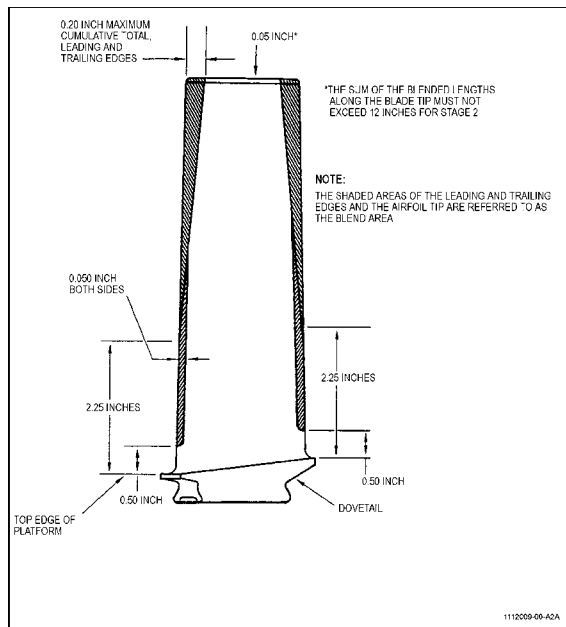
Stage 2 Compressor Blade Inspection Limits
